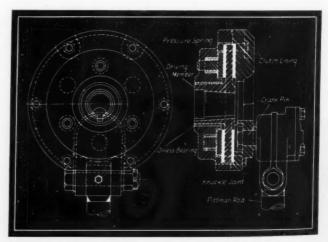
Multiple dry disk automatic slip clutch on pitman flywheel gives added protection to mower parts
